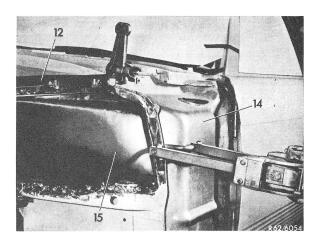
12 Wheel housing sheet metal 15 Wheel housing strut 14 Connecting panel
